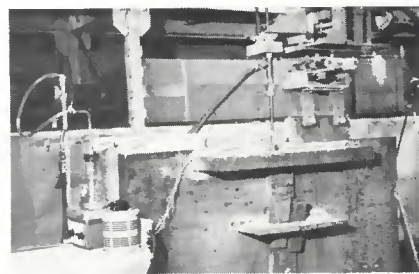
Setup for electroslag weldment with high external restraint and moisture addition to the welding atmosphere
